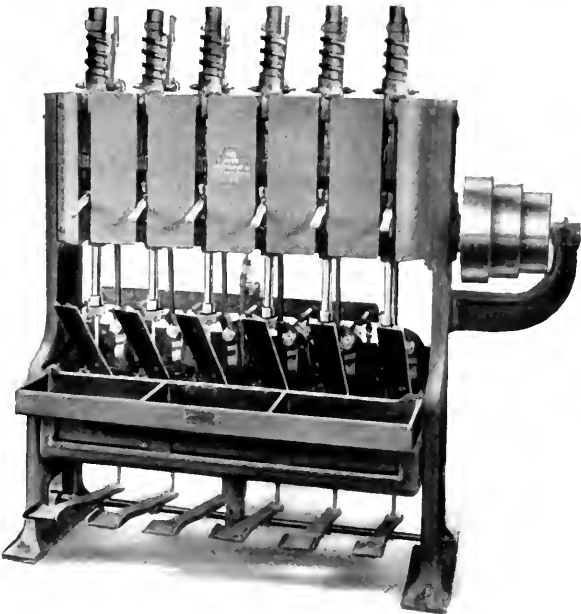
One-inch Size of Acme Semi-automatic Nut Tapping Machine
